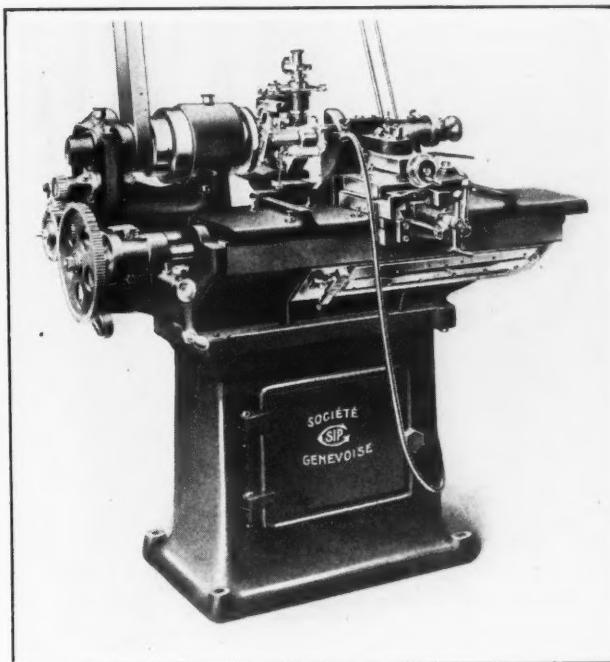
Societe Genevoise Machine for grinding External and Internal Screw Threads
